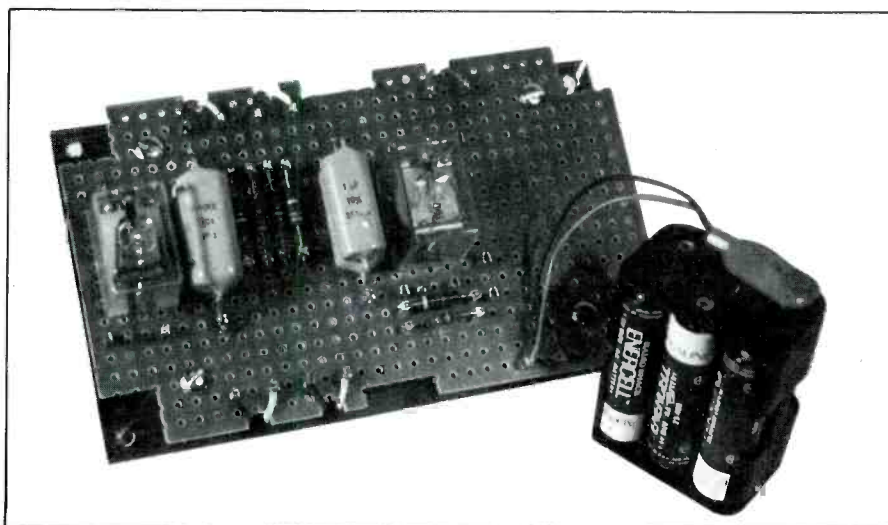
A piece of perforated terminal board, designed as a box top, fits nicely inside if its edges are filed. Corners, box center rib clearances, and five notches for wires all can be cut with hacksaw and file or nibbling tool.
